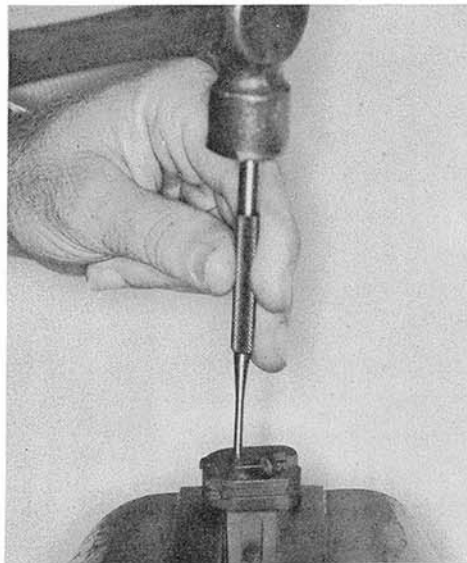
BAYONET-KNIFE DISASSEMBLY
